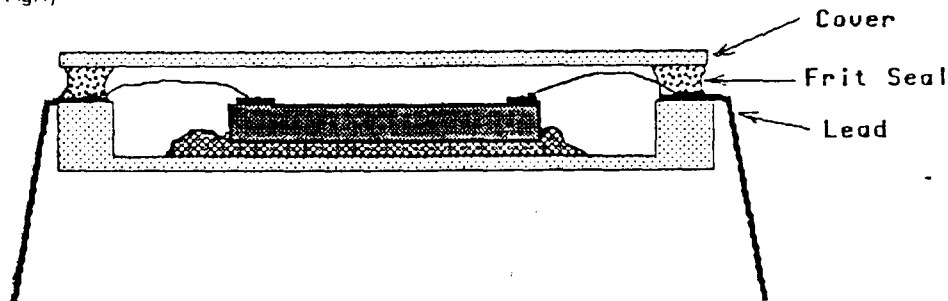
Wires embedded in frit used to seal lid to I.C. package.
